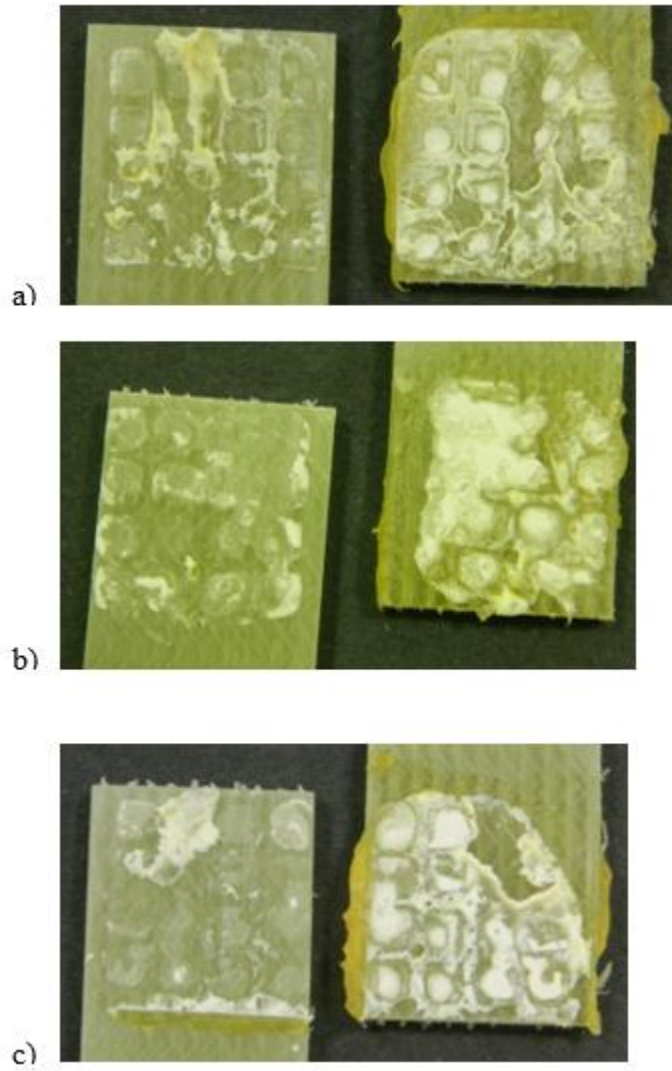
MMA adhesive fracture surfaces of specimens contaminated with composite dust tested a) 2, b) 9, and c) 33 days after manufacture.
